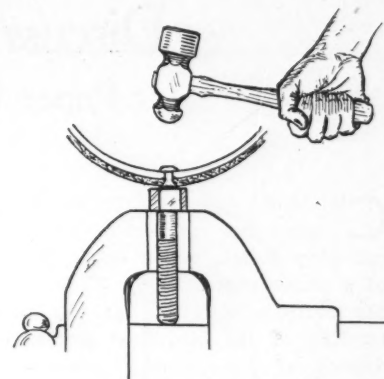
Riveting should be done with care. A simple method is shown in the illustration above
